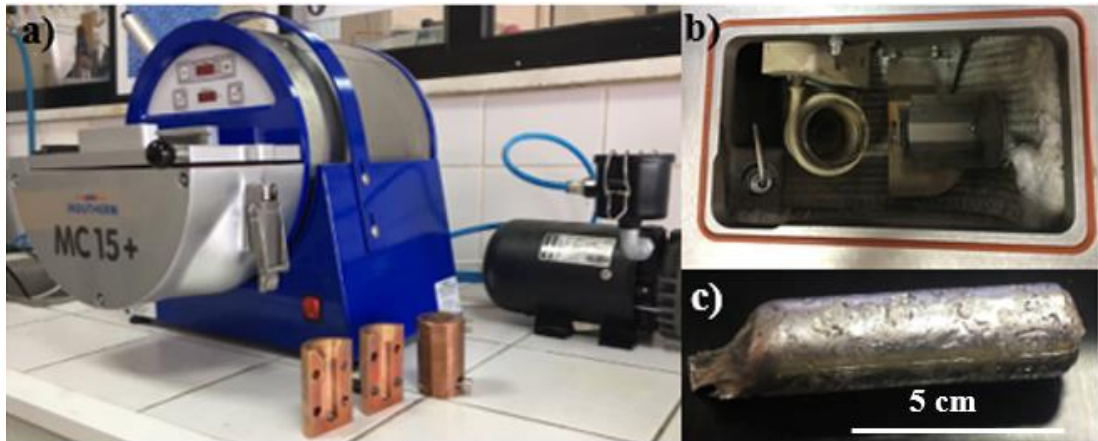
8. a) Induction melting and casting setup with copper molds used in this study, b) inside view of the setup and c) rod produced via casting.
